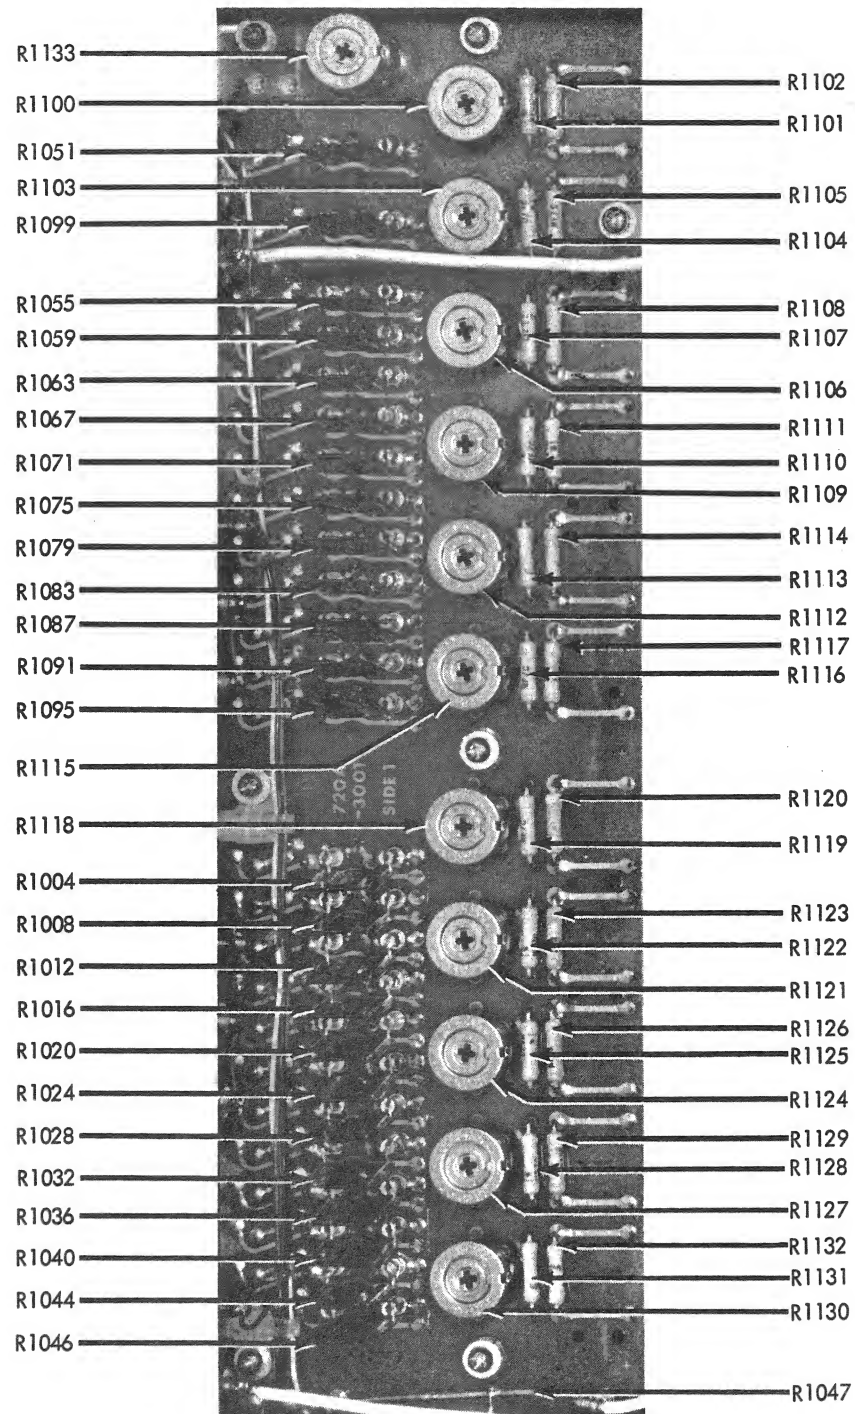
TRIMMER P/C ASSEMBLY (Sheet 1 of 2)
